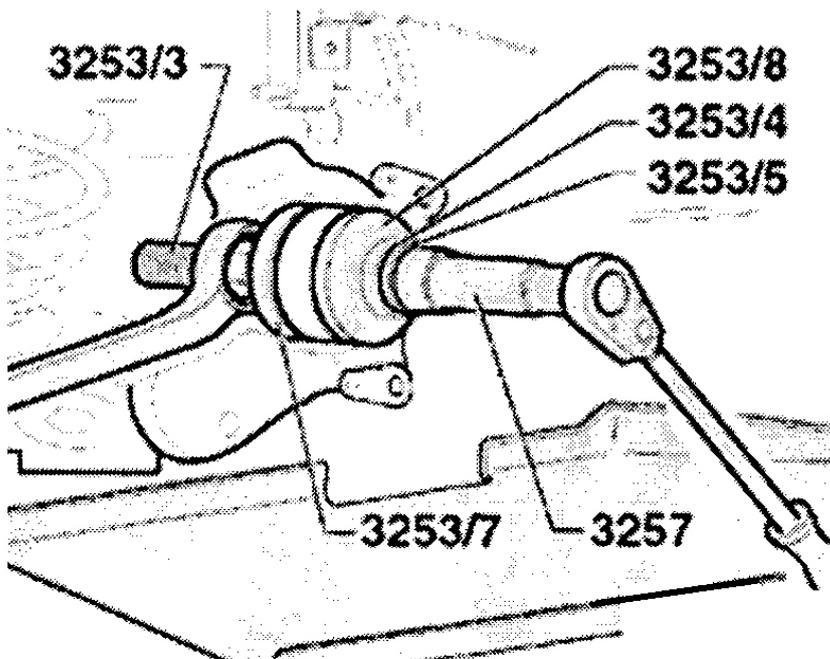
Removing & Installing Wheel Hub & Bearing (1 Of 2)
